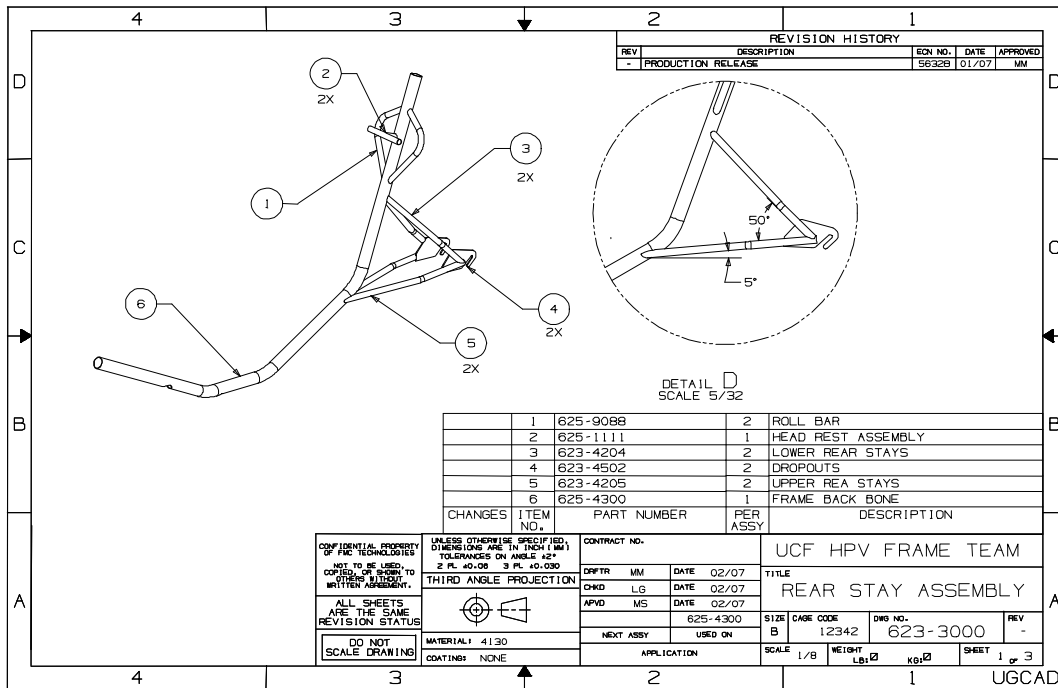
Detailed Drawing of Rear End and Roll Bar Assembly.
